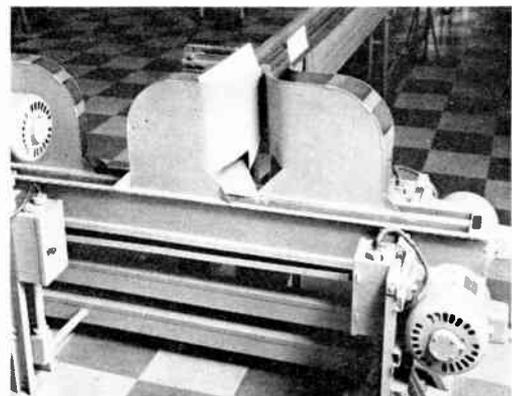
Typical arrangement of "V"-belt conveyor, gravity transfer and motor drive
